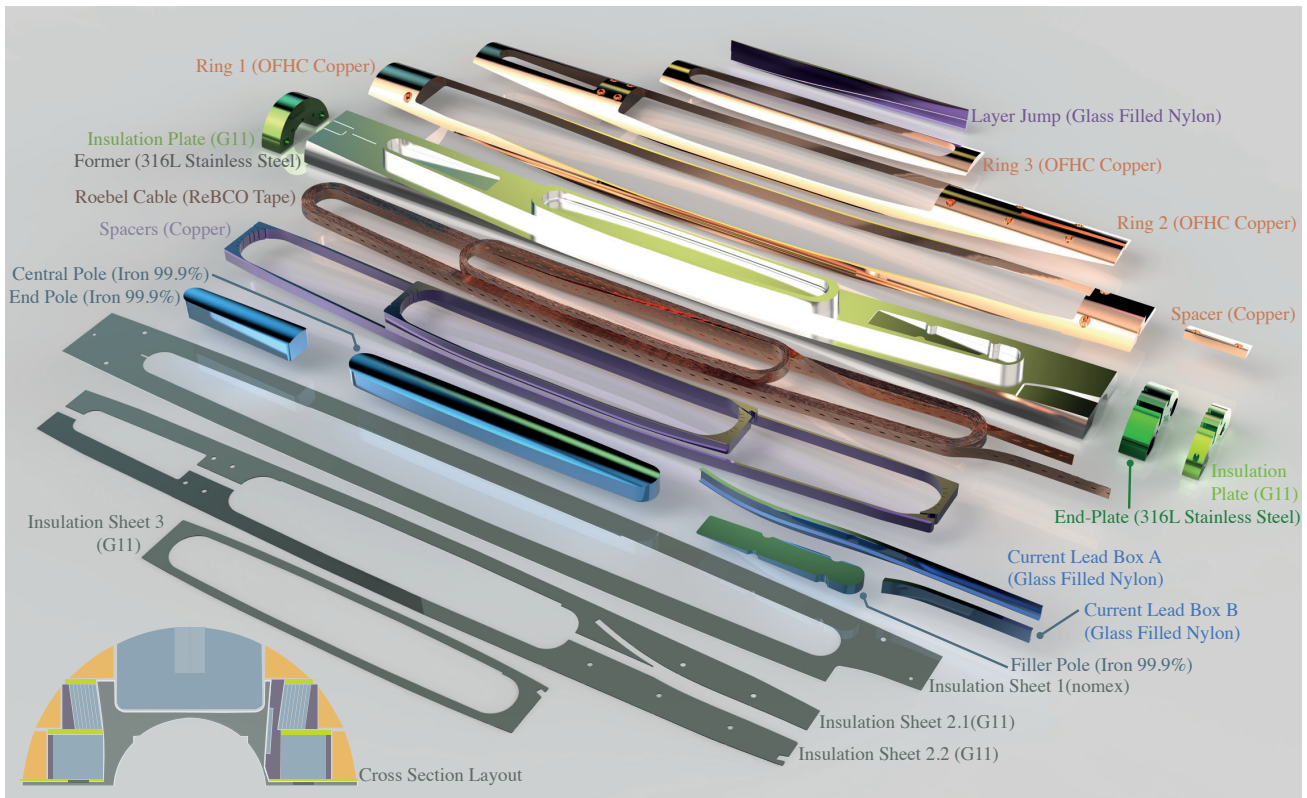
Rendering showing an exploded view of all the parts making up one of the Feather-M2 magnet poles. Visible from top to bottom are the copper rings, the spacers, the coil-windings and joint area, the former, the iron poles and the G11 insulation sheets.
